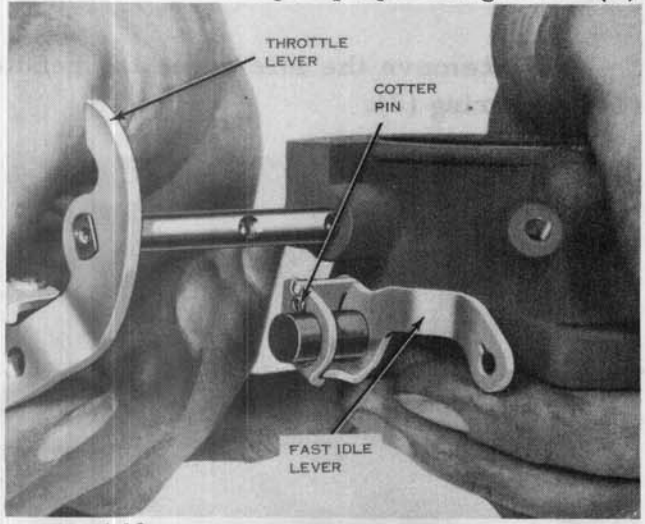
REMOVE THROTTLE LEVER & FAST IDLE LEVER
